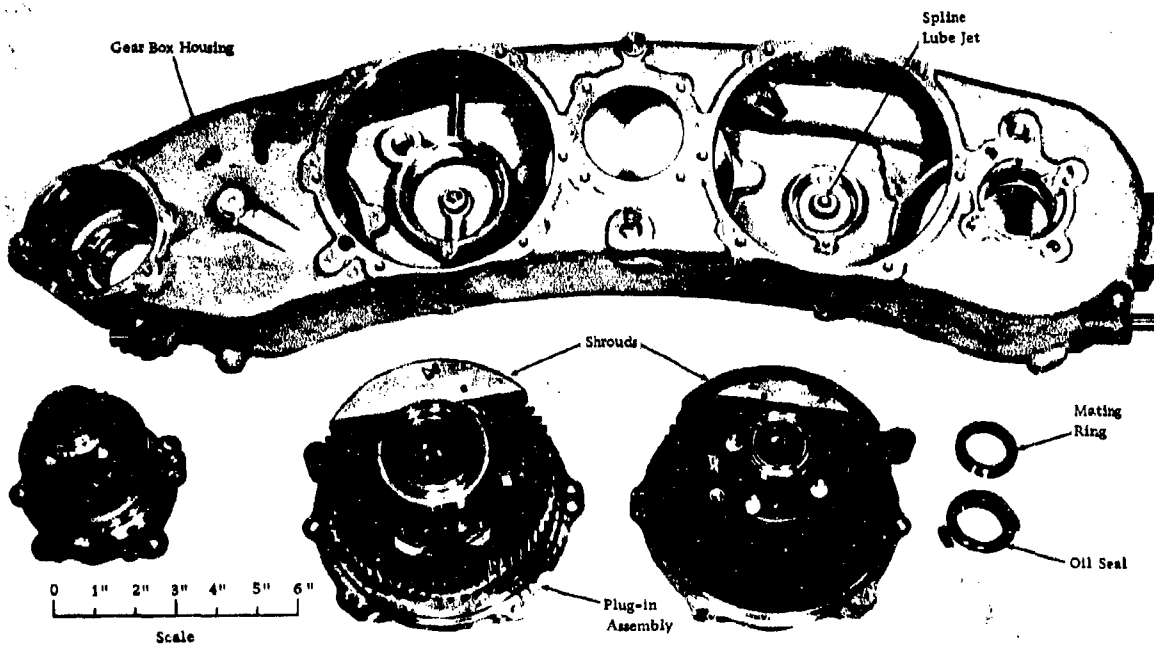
PHASE IIC ACCESSORY GEARBOX
